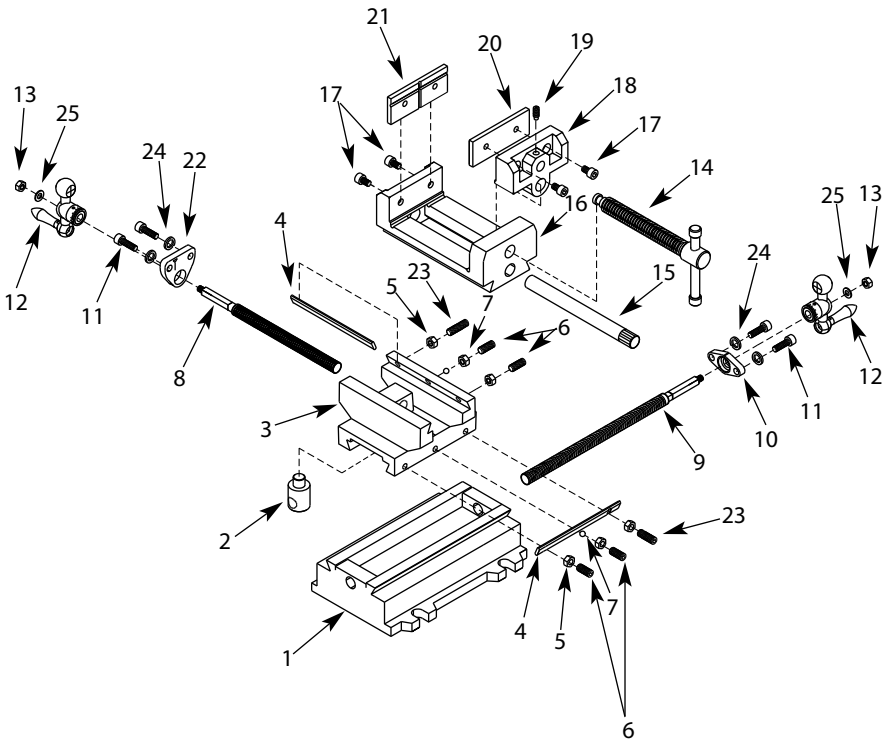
Replacement Parts Illustration for 3" , 6" and 8" Cross Vise
